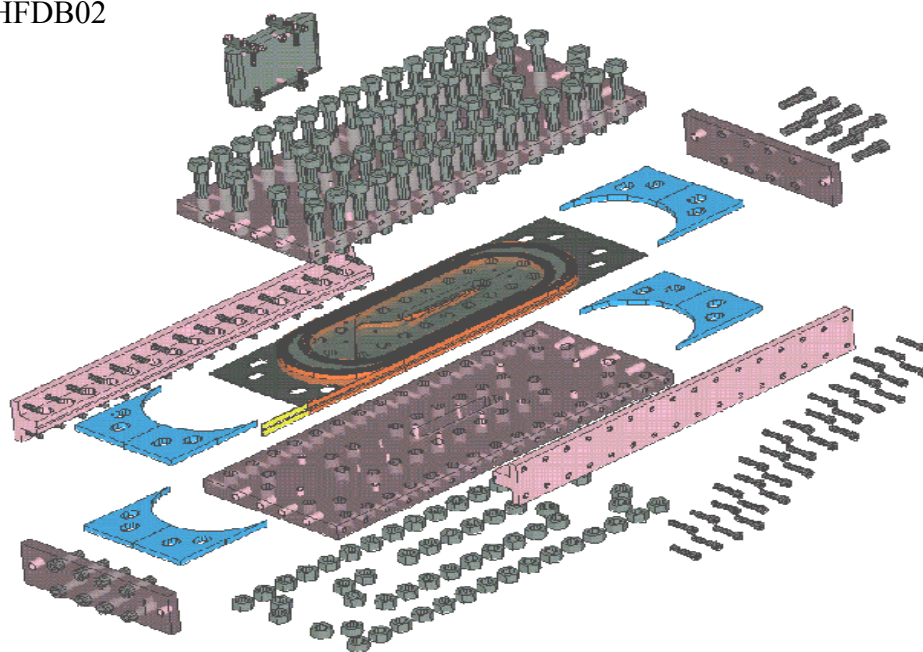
Racetrack magnet HFDB02, exploded view.
